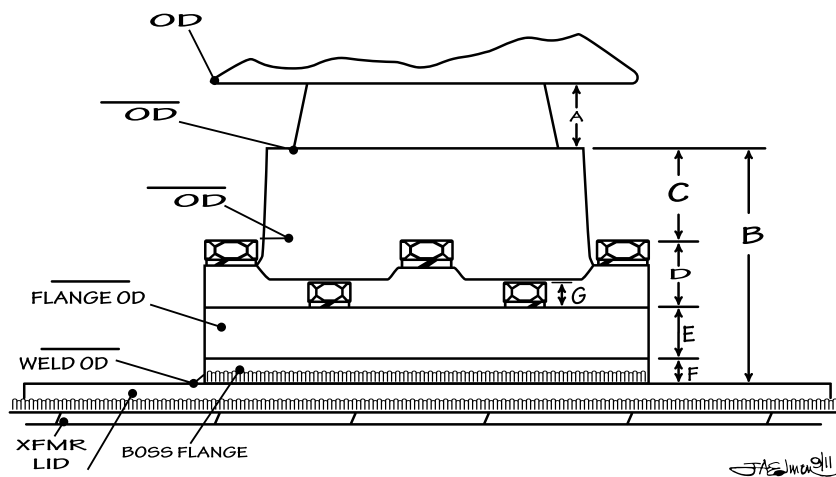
Sample of a measurement diagram that the technicians use to document the dimensions of a bushing for the precise fabrication of a clamp
